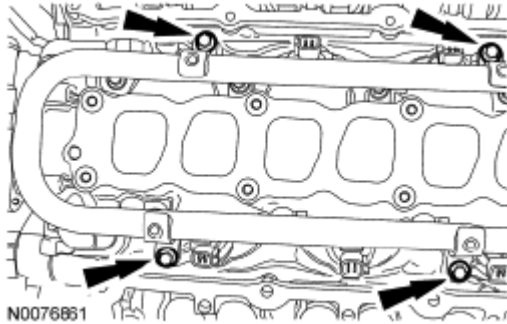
Locating Fuel Rail & Injectors Assembly Bolts
